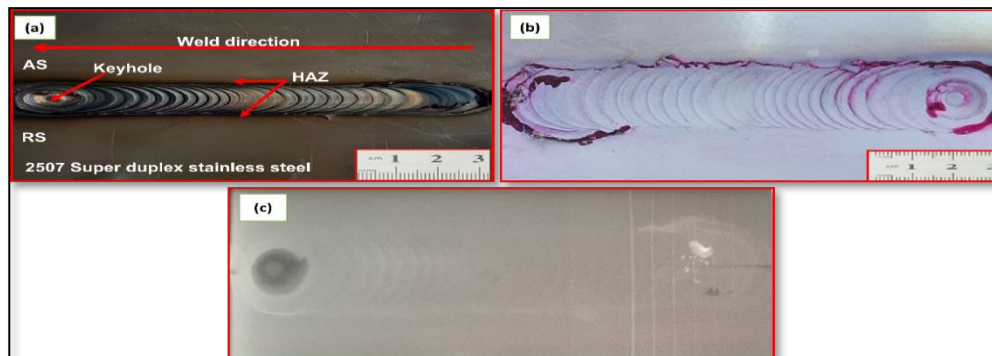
Top view of the 2507 SDSS FSWed joint, (a) FSW at 400 rpm, 25 mm/min, 15 kN and tilt angle 3° , (b) image for liquid penetration test of 2507 SDSS welded by FSW and (c) Radiographic images of the 2507 welded by FSW
